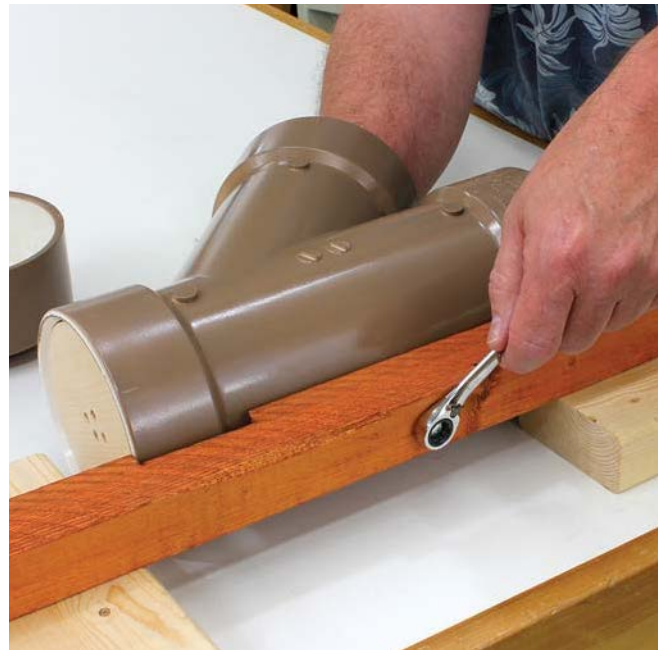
Locate the lower bolt in a spot that's easy to reach from inside the wye fitting.
